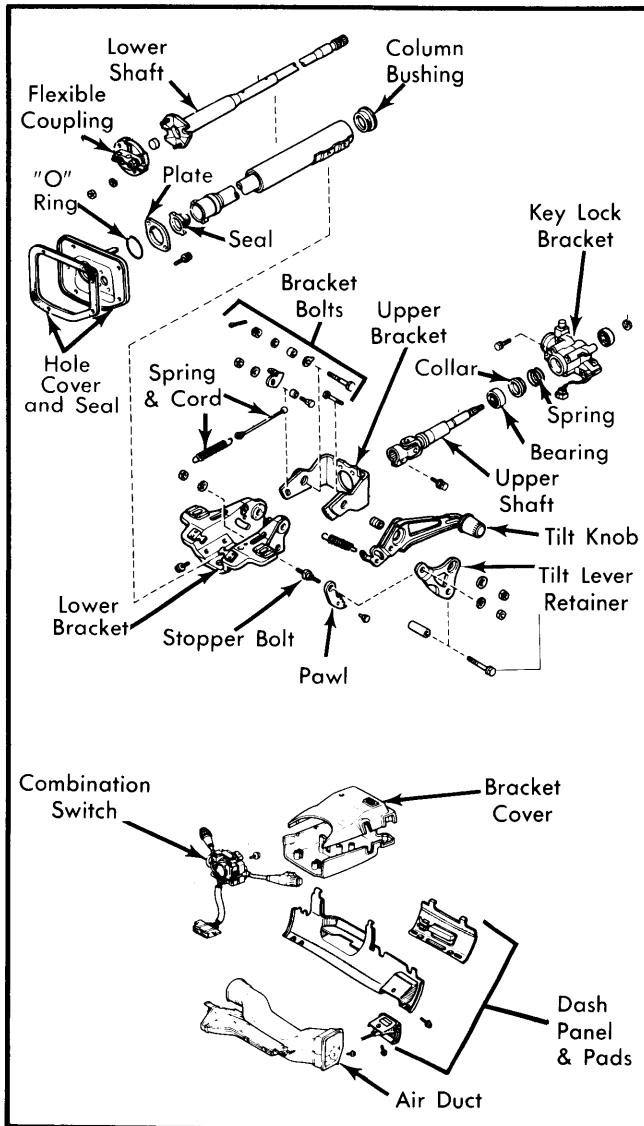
Exploded View of Passenger Car Tilt Steering Column
